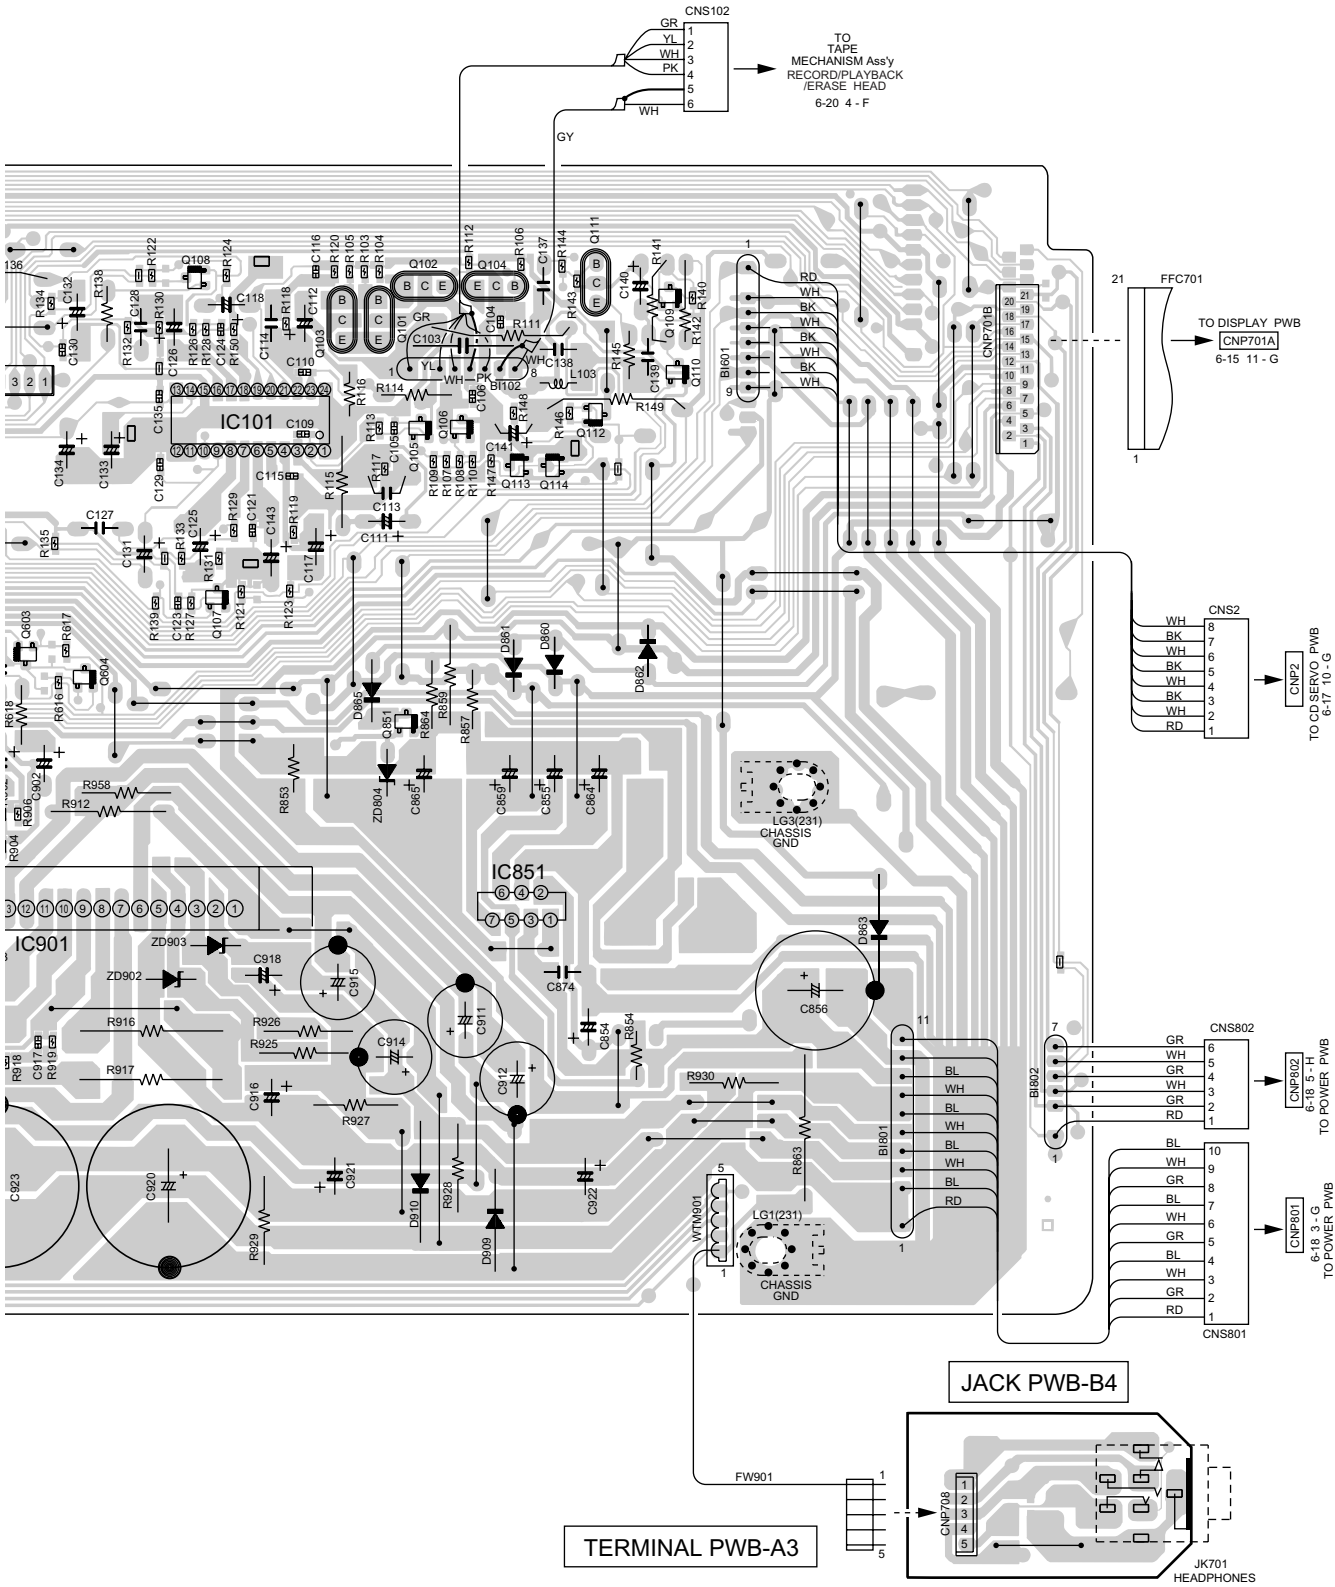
WIRING SIDE OF P.W.BOARD (2/9)
